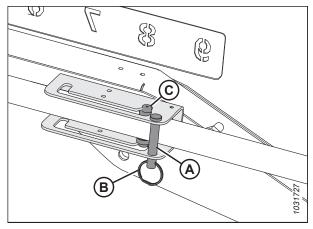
Fore-Aft Cylinder Adjustment Type 2 – Aft Position
